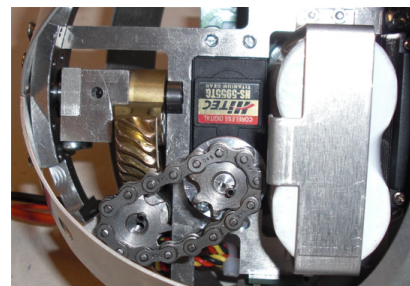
Roller chain connecting the servo motor to the worm gear.
